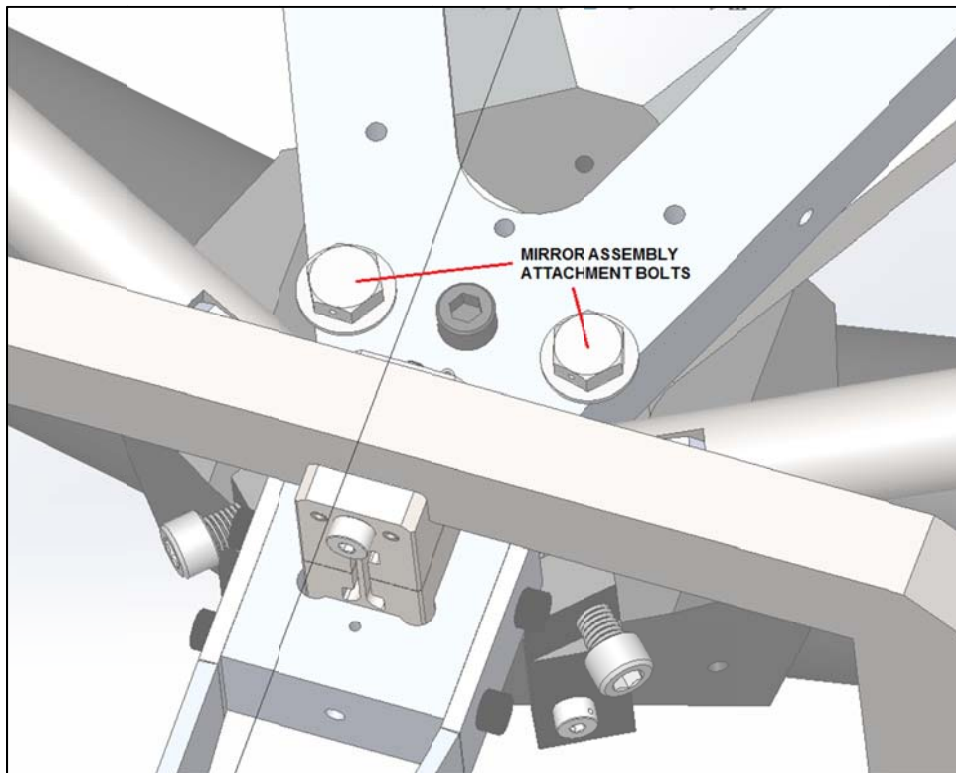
On axis Mirror Assembly attachment HW. Bolts are drilled head for safety wire after final alignment.
